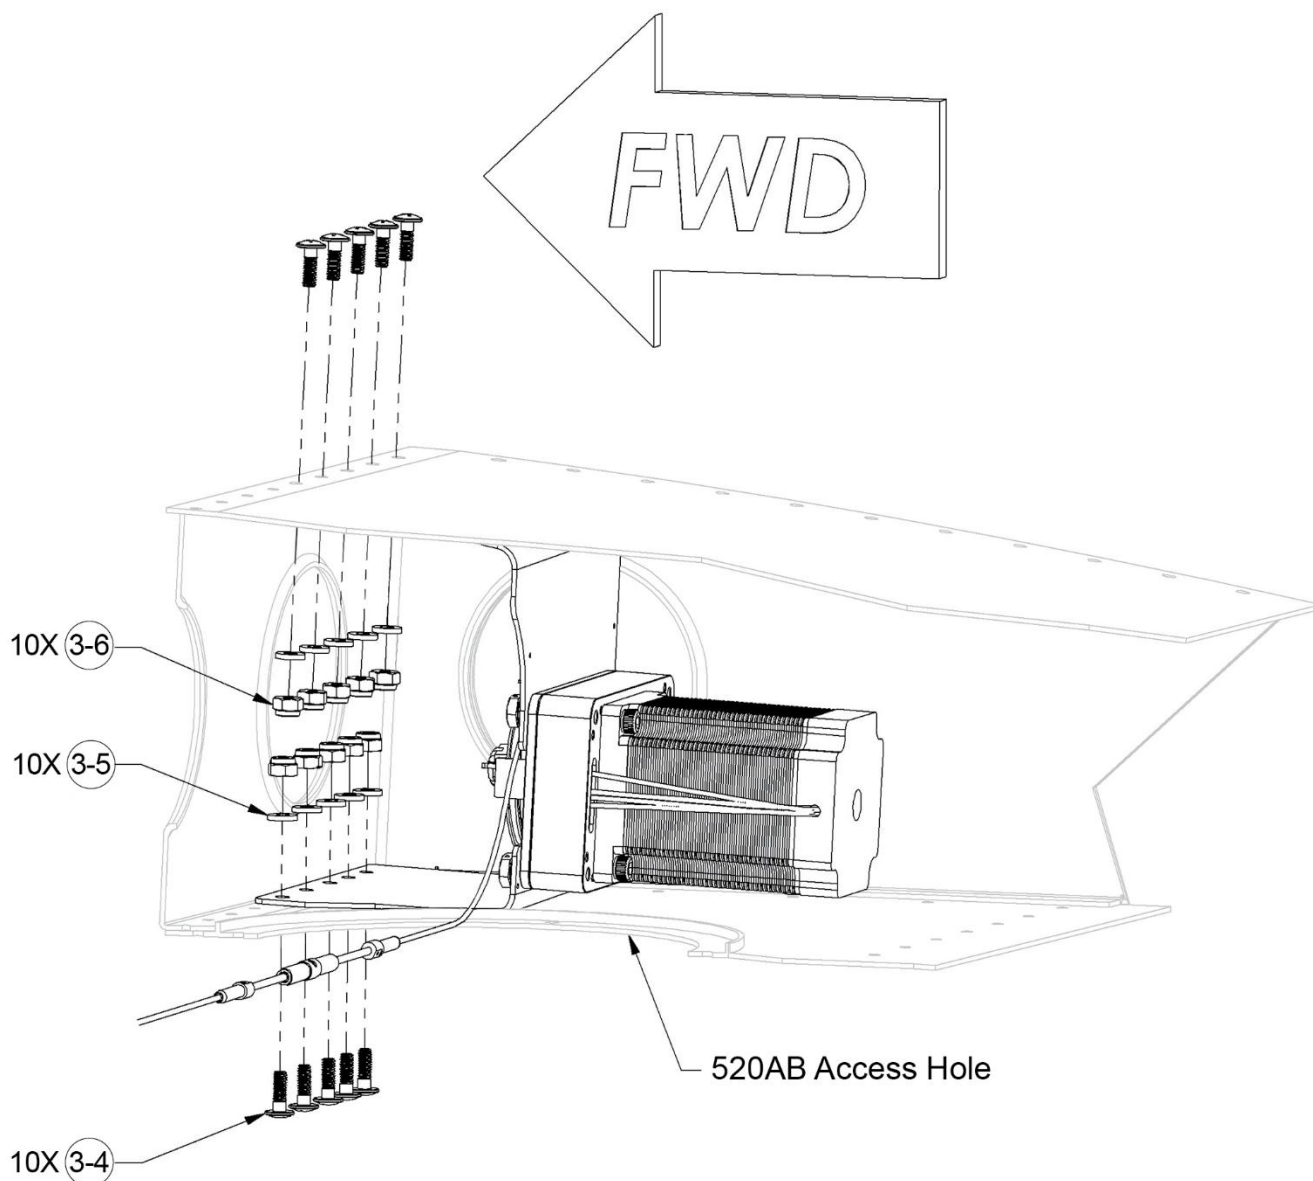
Attaching Roll Servo Assembly to Wing Skins and Rear Spar
